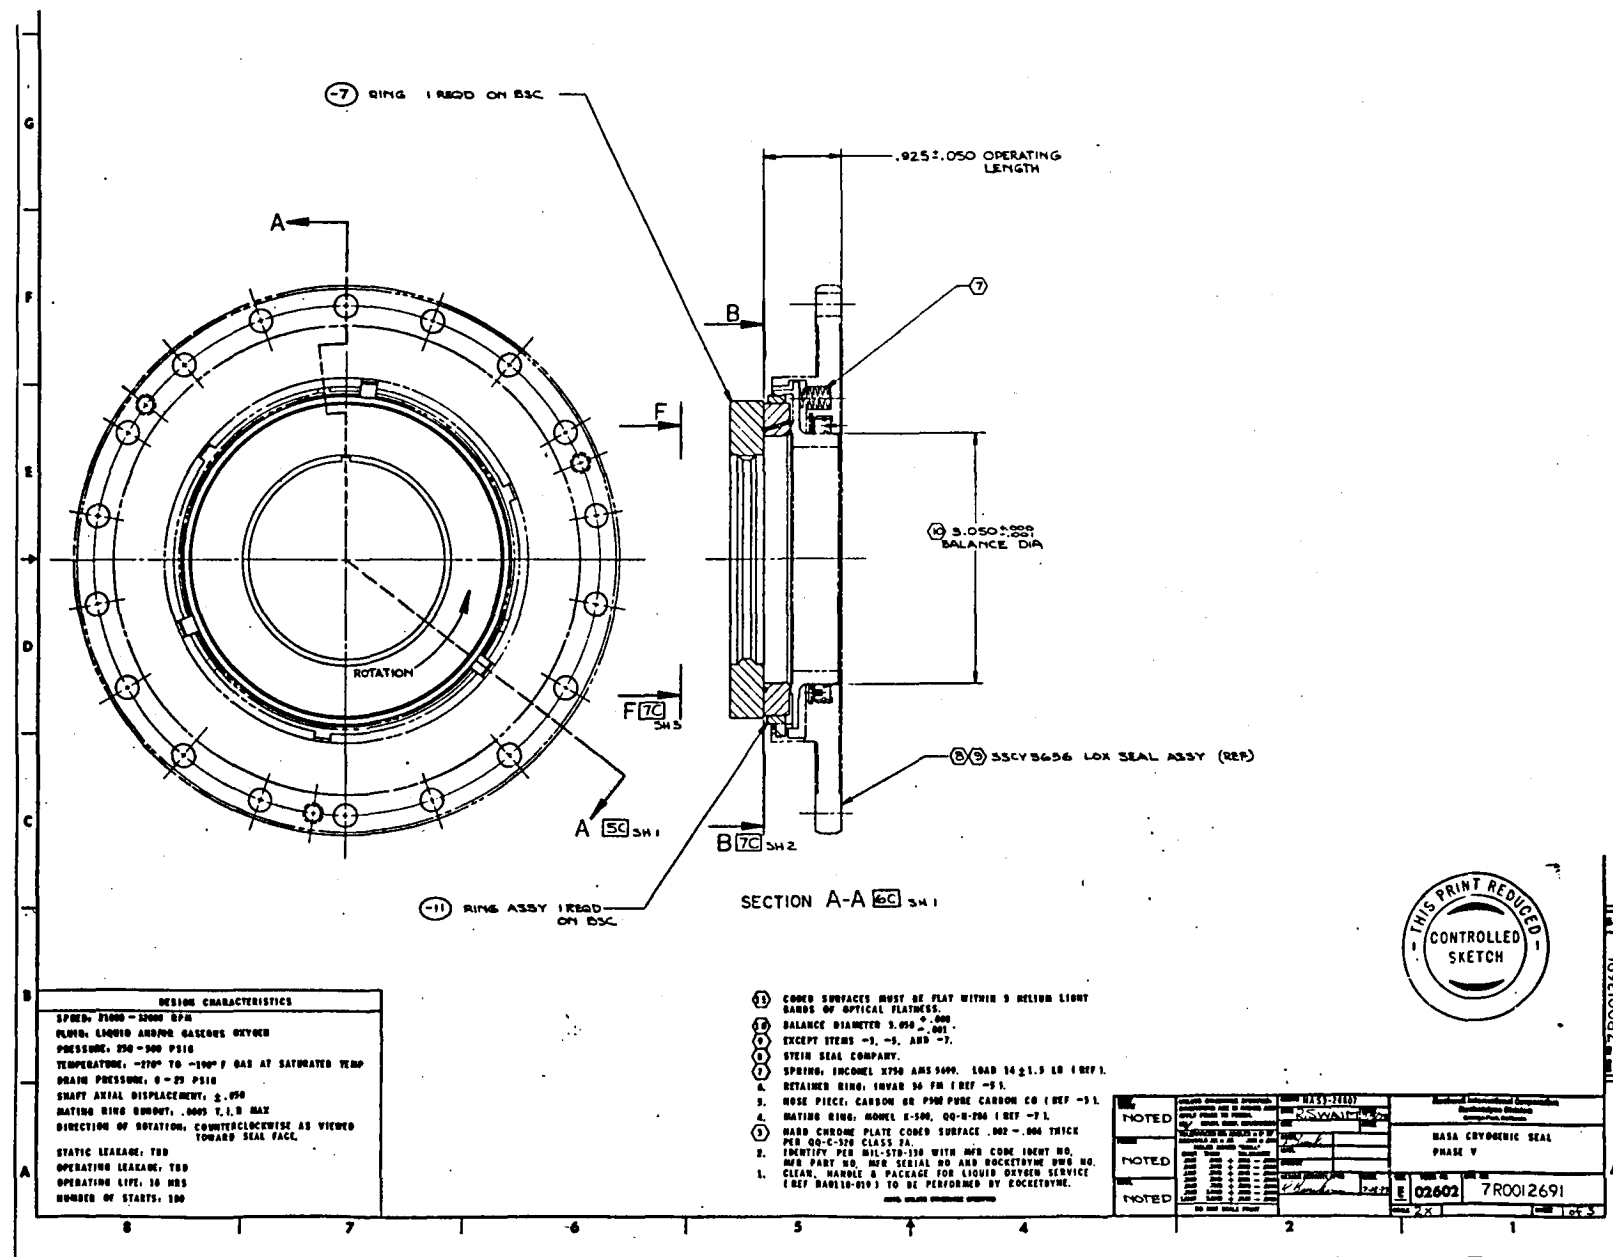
Phase V Outward Pumping (Pressure Balanced) Spiral Groove LOX Seal Assembly
